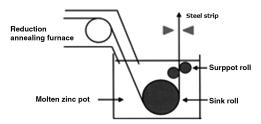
Position of sink roll and support roll in the molten zinc pot
